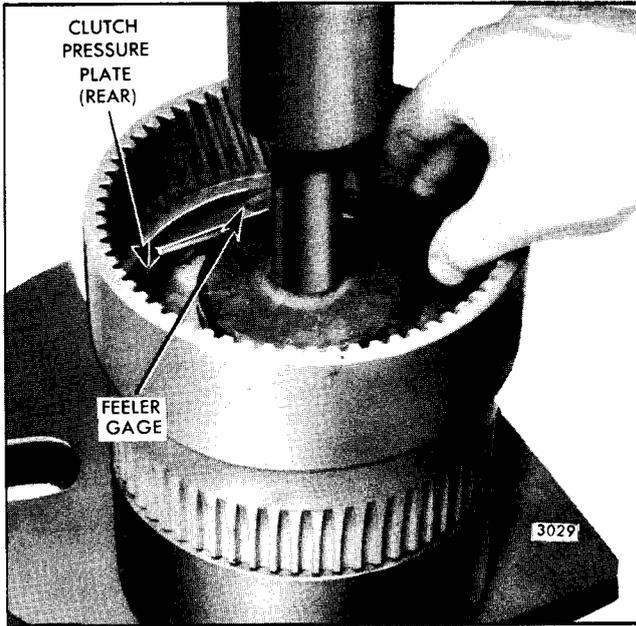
Measuring Gap for Forward Clutch Selective Spacer (Snap Ring)
